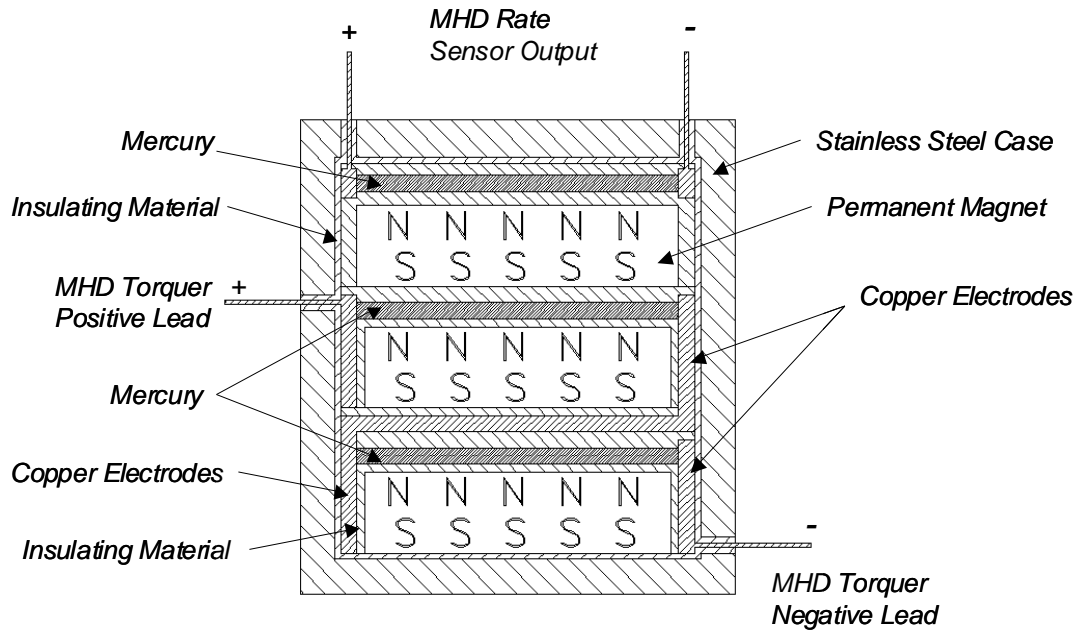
Cross-Section of MHD Actuator / Sensor Upper Right Quadrant
